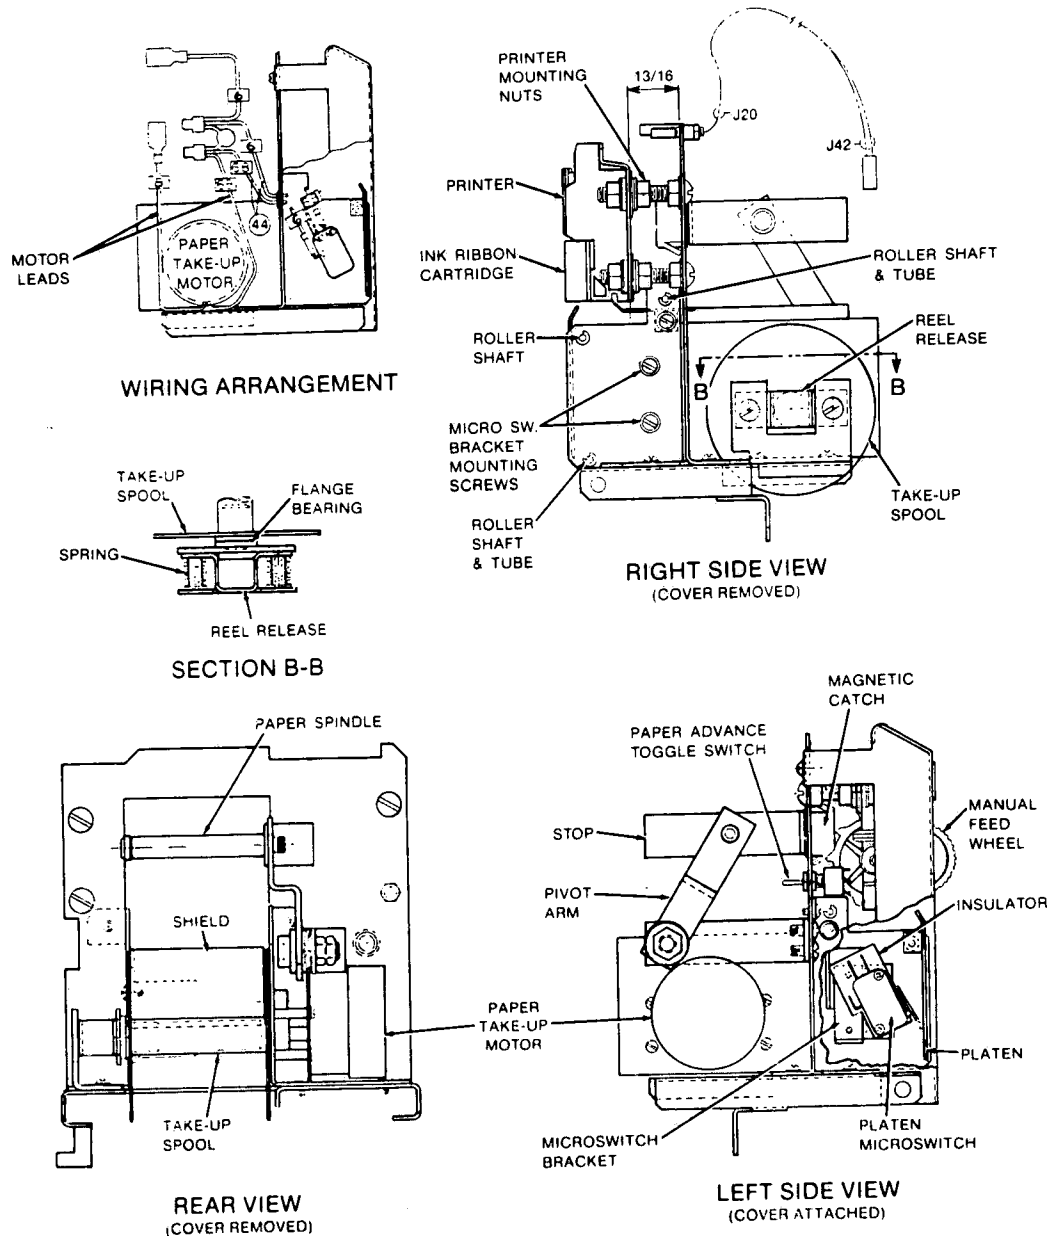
PRINTCON PRINTER ASSEMBLY.
